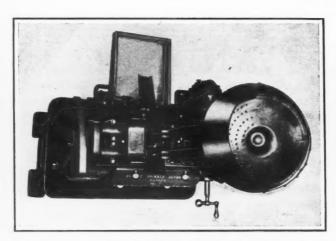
Top View of Anderson Tapping Machine, showing the General Arrangement of the Mechanism
